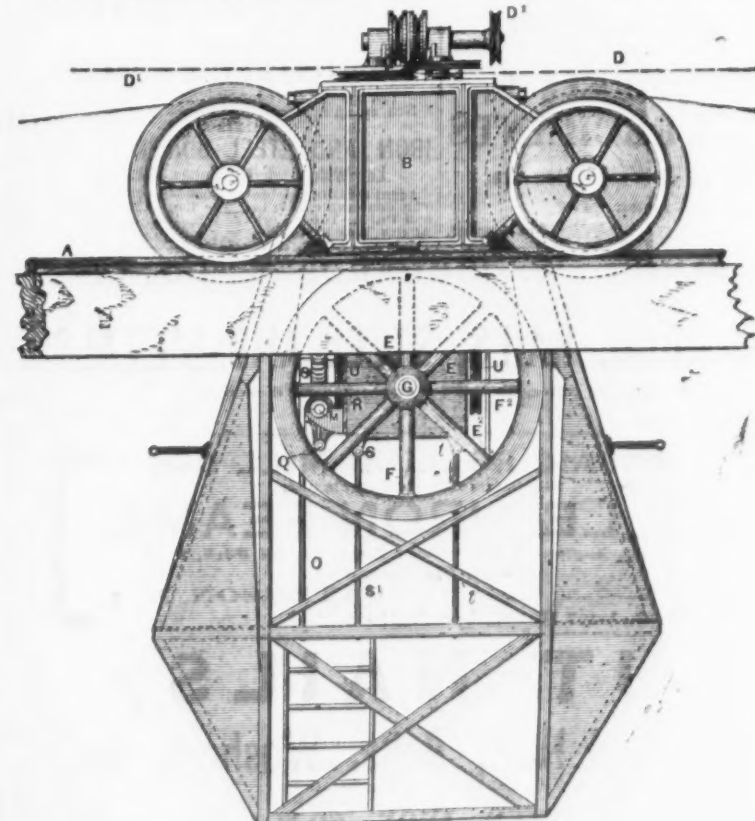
End Elevation of Crab End of Traveling Crane.
